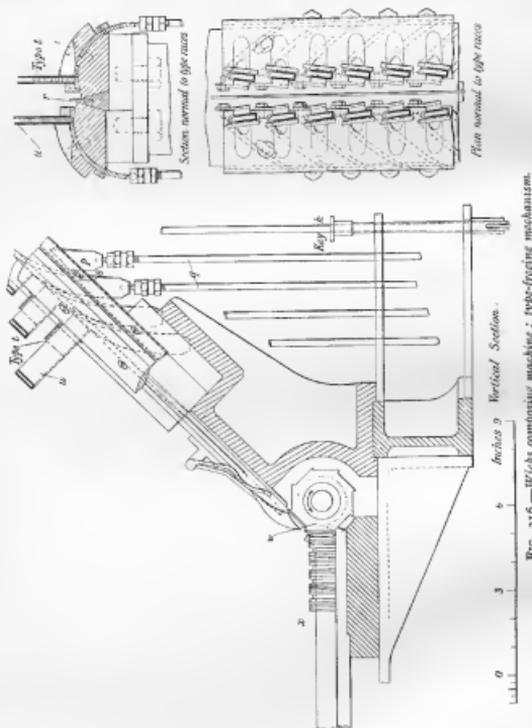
Wicks composing machine: type-faceting mechanism.
